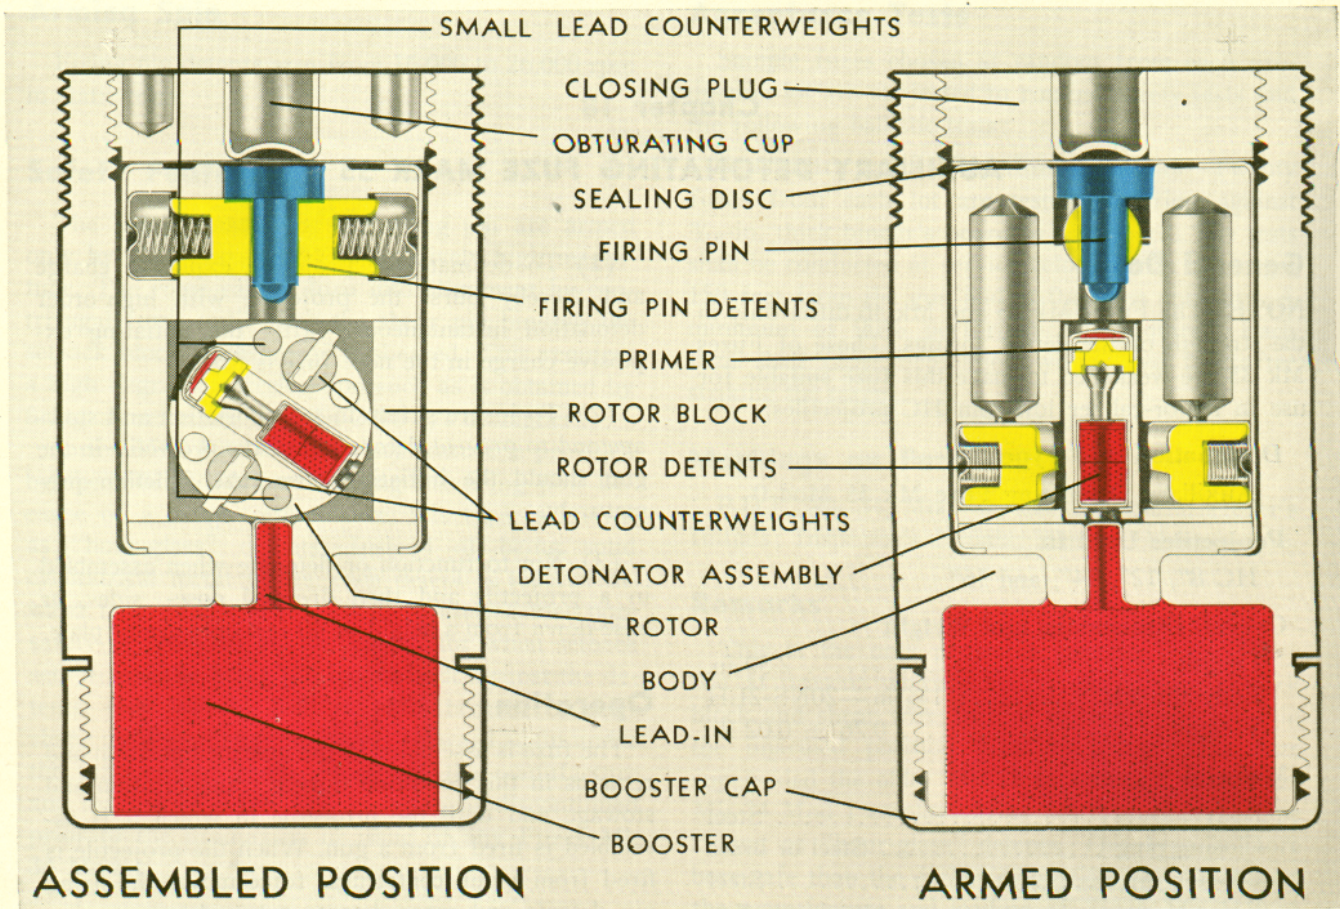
Auxiliary Detonating Fuze Mk 35—Sectional View
